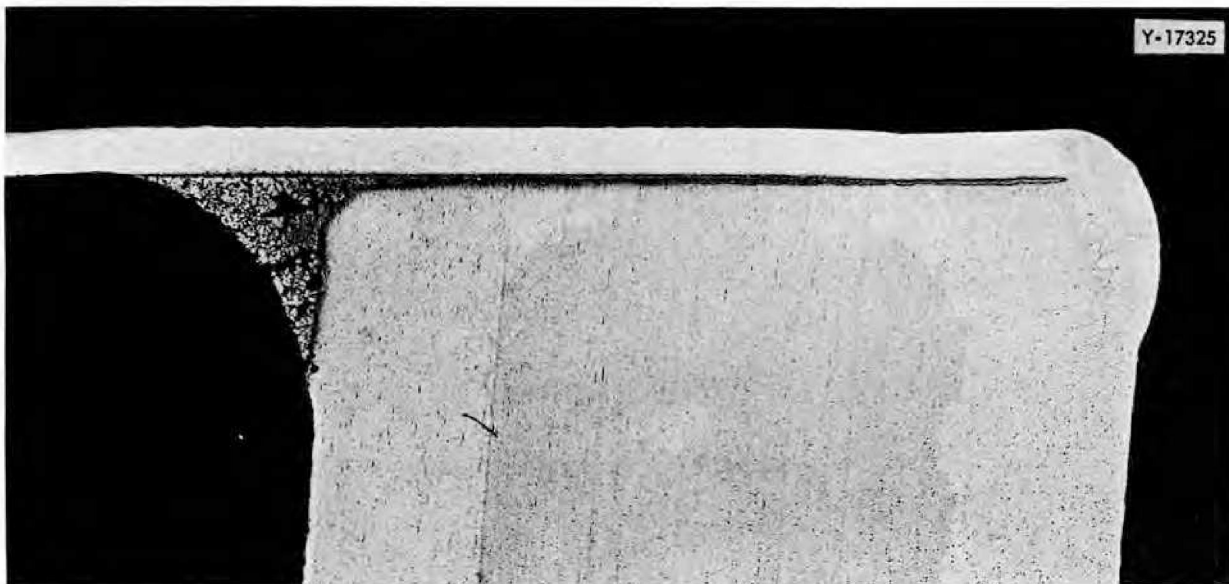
Tube-to-Header Weld after Back Brazing. Etch: 10% oxalic acid; electrolytic. 12X.
